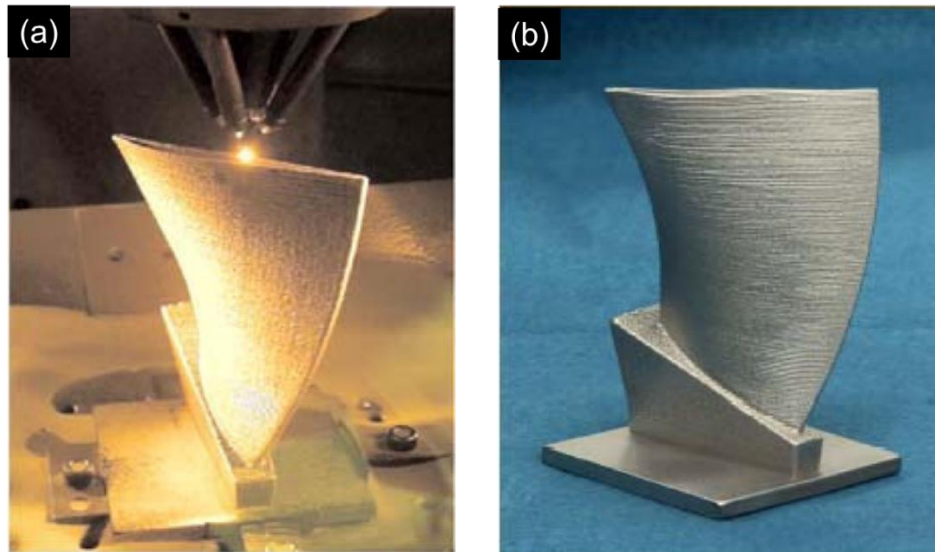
(a) LENS® processing of blade and (b) final built blade (courtesy of Optomec Inc.)
